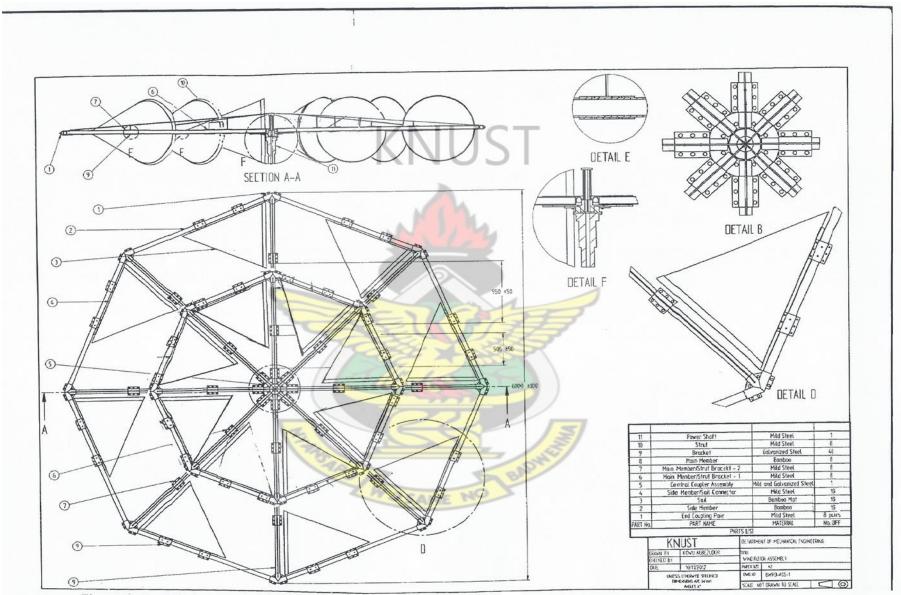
Wind rotor assembly (sixteen sails)
